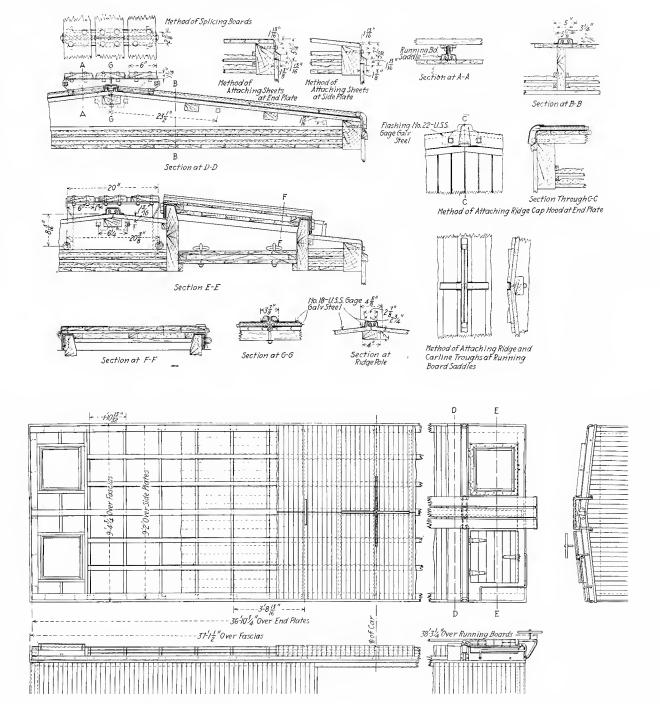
General Arrangement and Details of Outside Type of Franklin Flexible Metallic Roof for Refrigerator Cars. Franklin Railway Supply Company.
